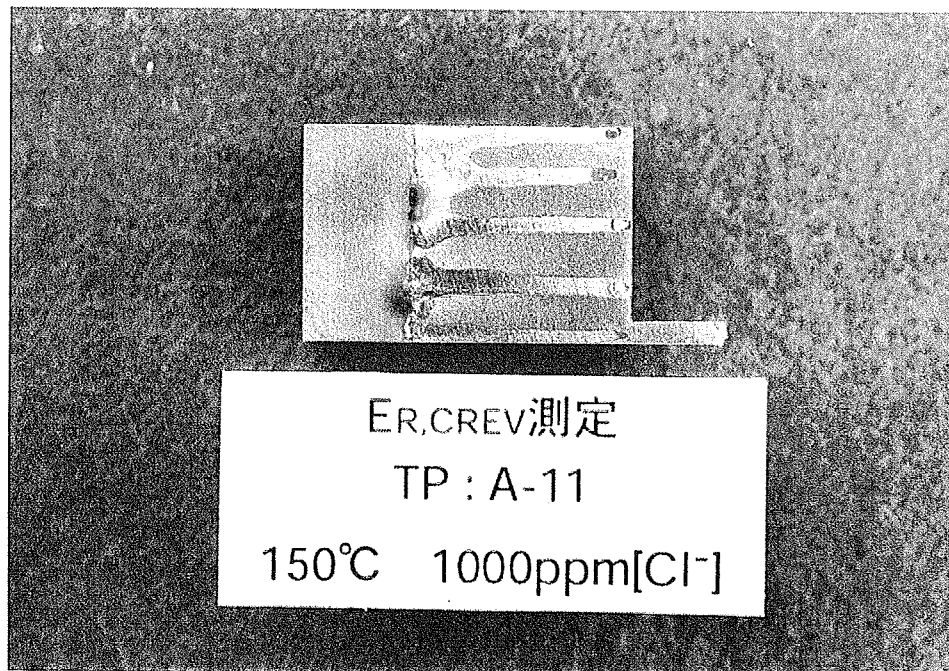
Photo of crevice opening surface and internal surfaces of the crevice with cutting the test piece, about welded crevice test piece A-11 after test (repeatability test)
